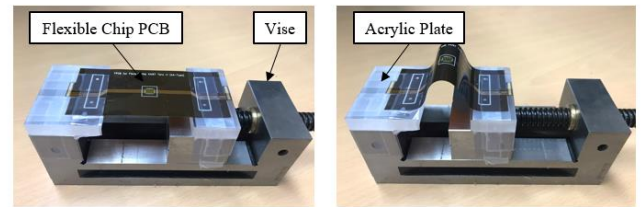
The measurement jig of the flexible chip and PCB. The vise is used to bend the flexible chip. To avoid signal degradations by the metallic effect of the vise, the acrylic plate is used. (a) The flexible chip without the bending. (b) The flexible chip with the bending.
